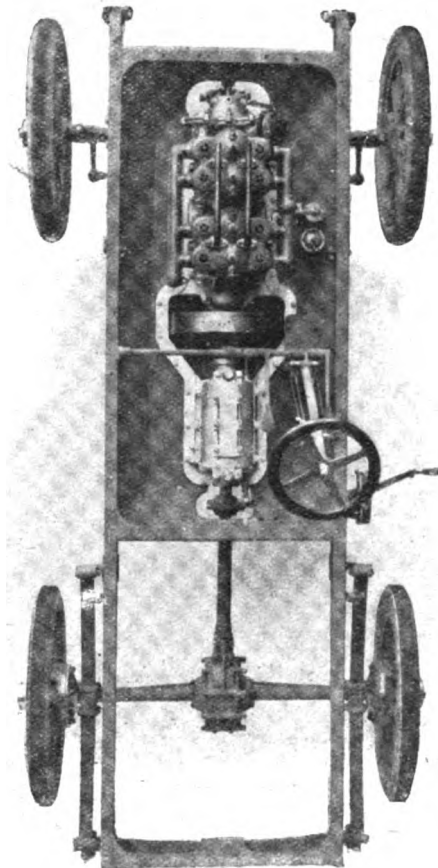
Chassis of Decauville 16-h.p. Car.
